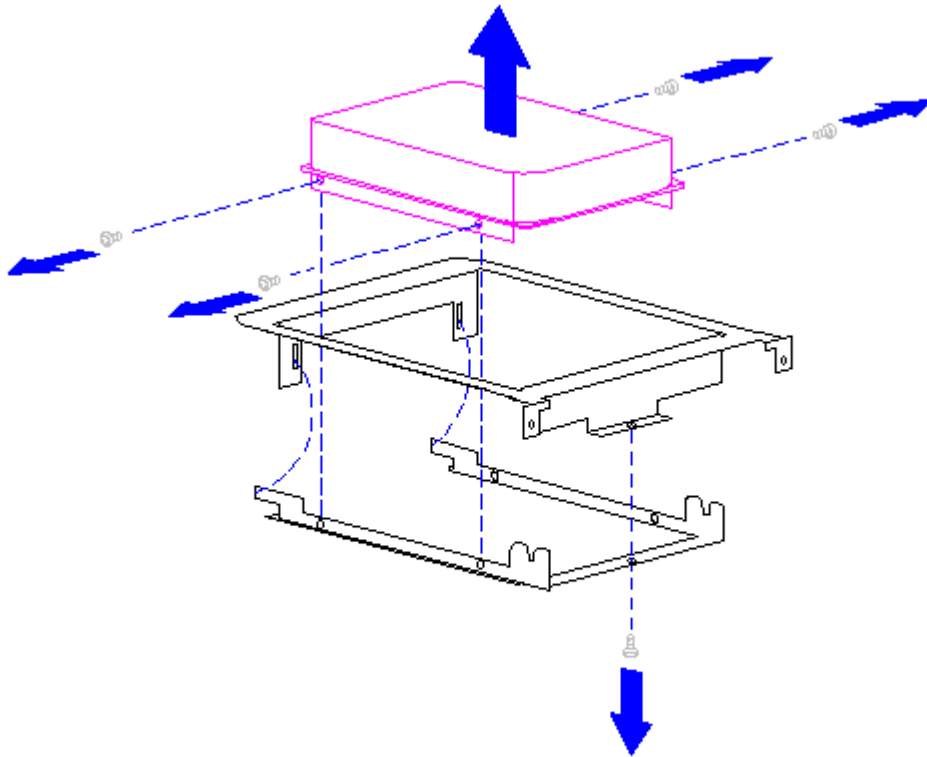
Removing the Mounting Bracket from a Hard Drive
